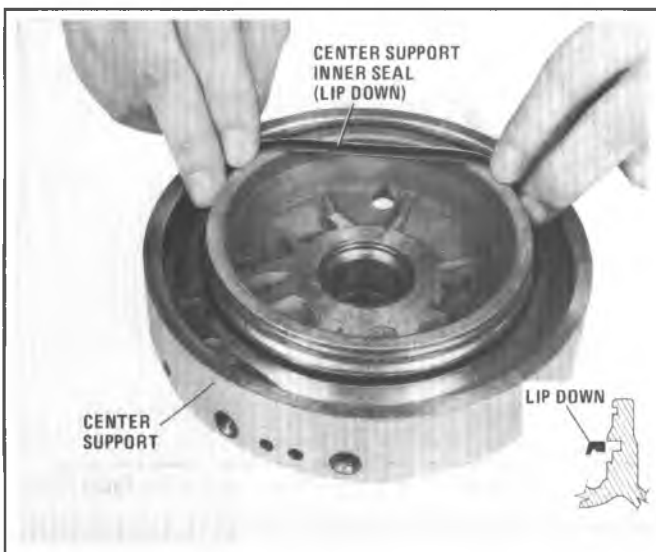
A6-164 Installing Fourth Clutch Inner Seal
